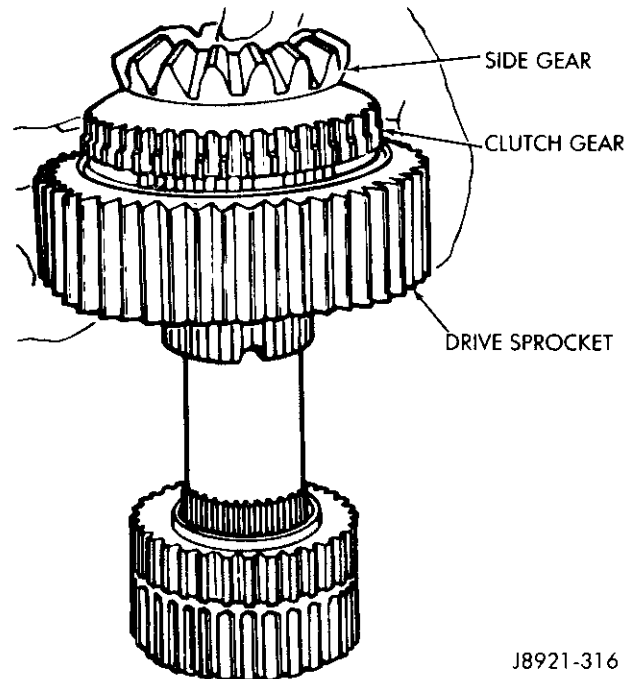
Removing Side Gear, Clutch Gear And Drive Sprocket
